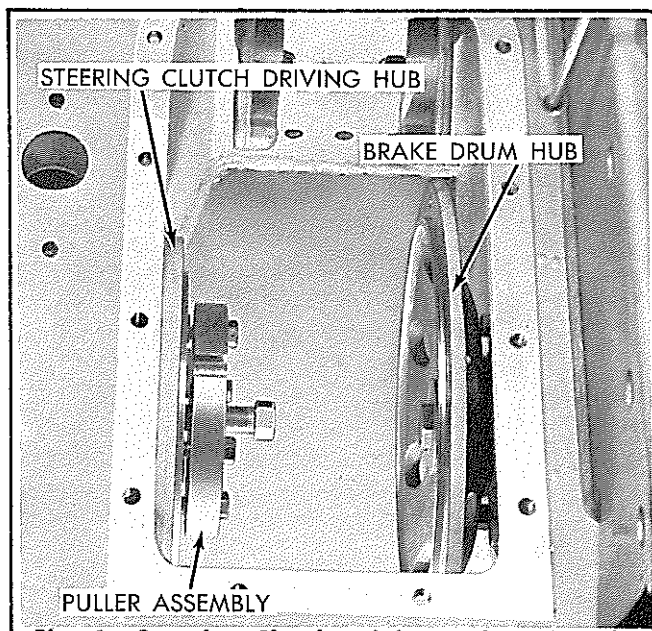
Steering Clutch Driving Hub and Brake Drum Hub Puller Installed
